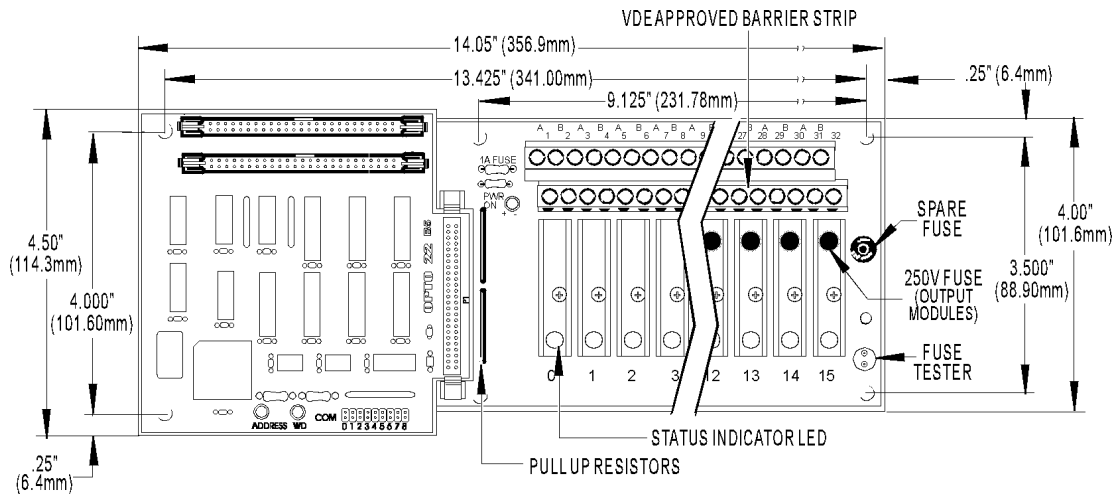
Mounting Dimensions of the G4PB16HC with a B5 Installed
